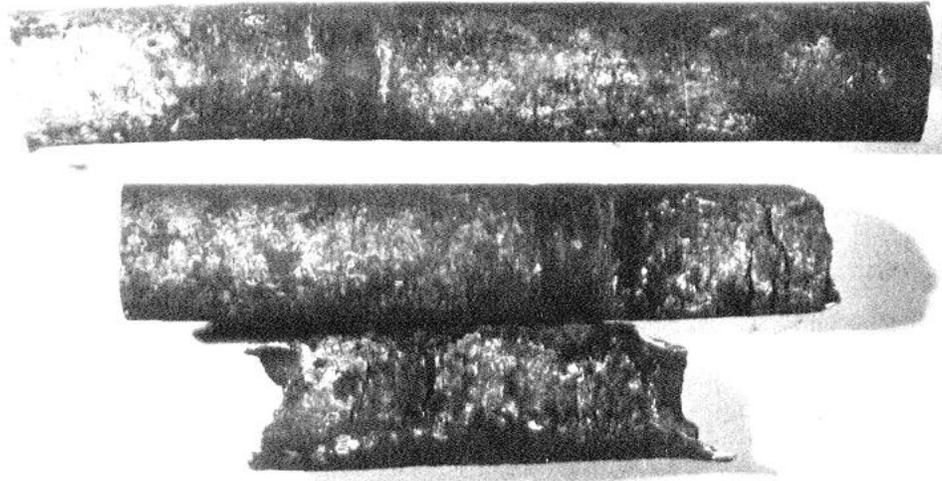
External stress corrosion cracking of brass heat exchanger tubes in a crude tower overhead system.
